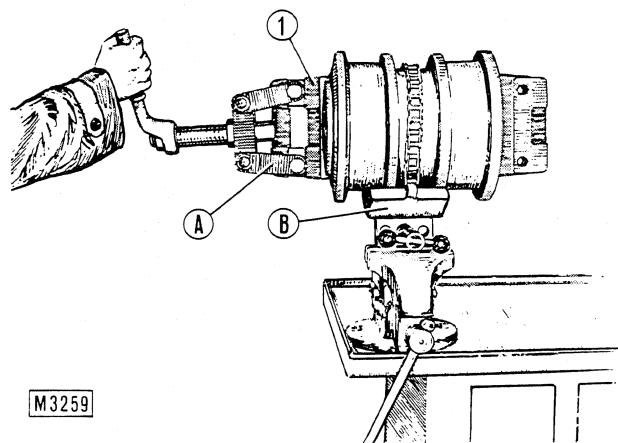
Disassembly of a roller support (1) using screw puller 75295488
